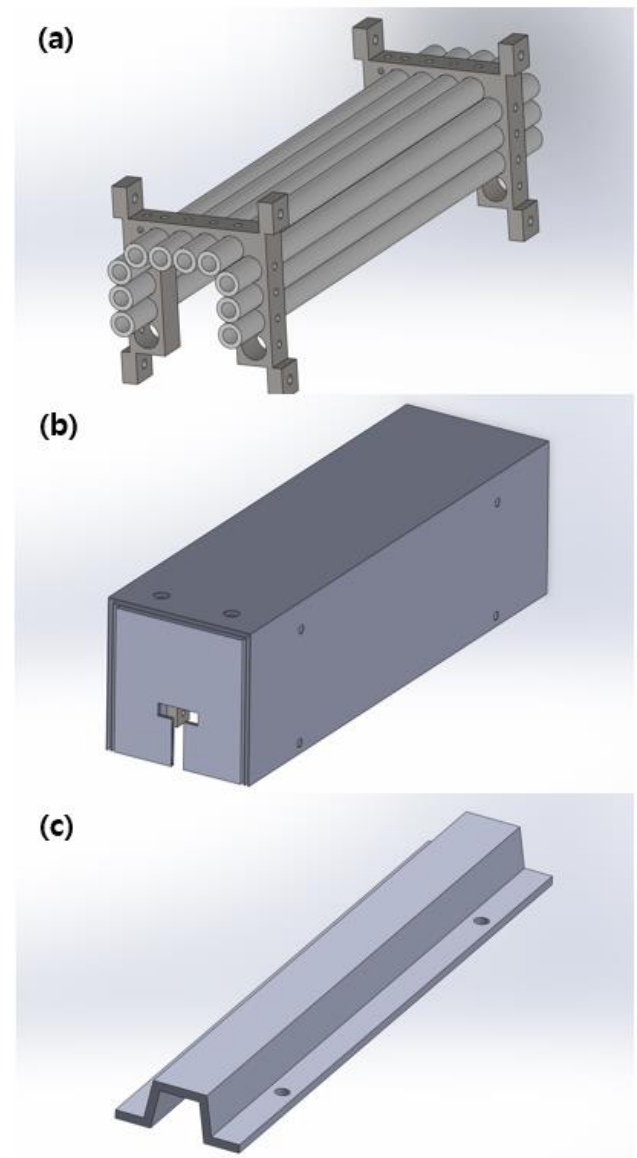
Design of heating device for reel-to-reel PLD (a) heating elements and alumina tube assembly, (b) multi-thermal shield, (c) quartz deposition shield.
